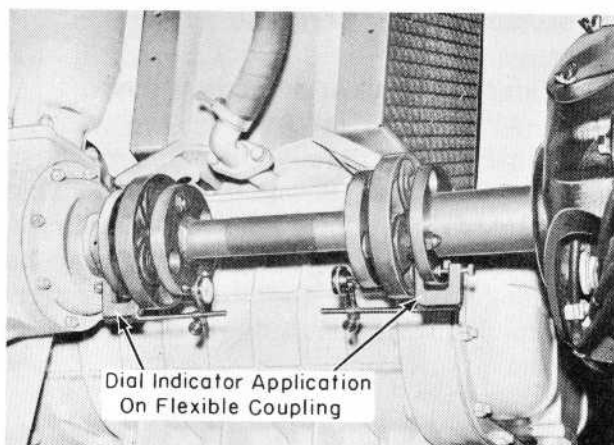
Auxiliary Generator Drive Coupling Alignment
